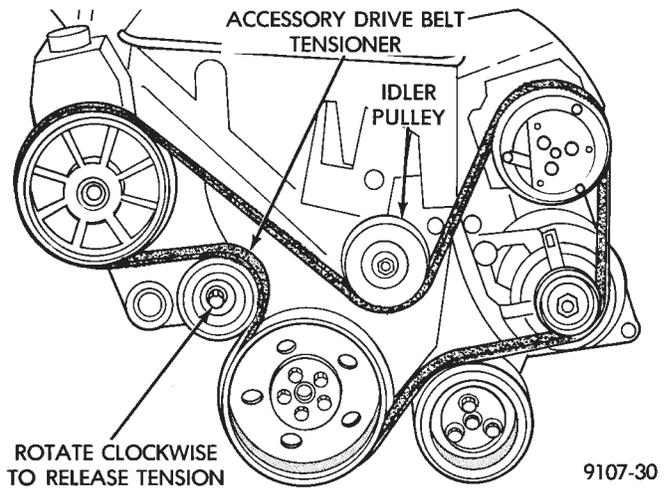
Accessory Drive Belt—2.2L Turbo III Engine
